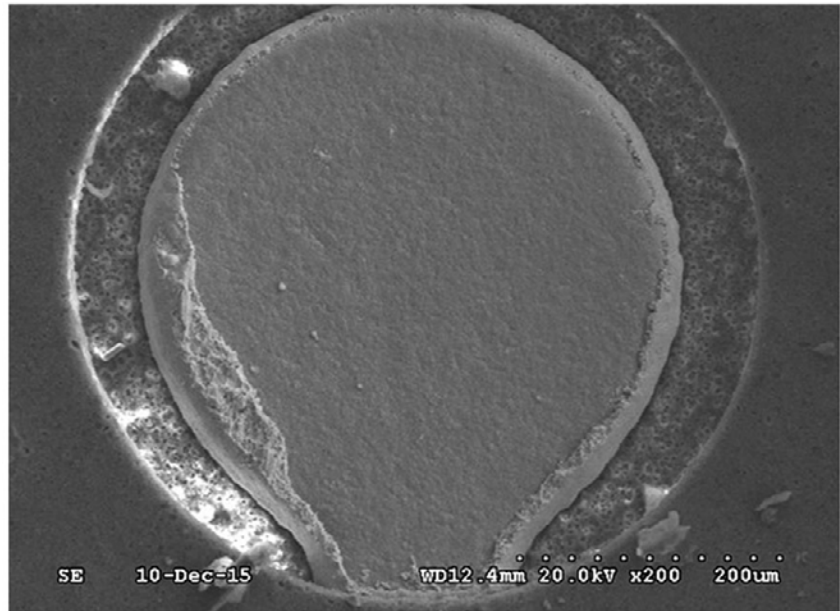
Brittle fracture surface on PB pad with small amount of solder remaining around perimeter.
